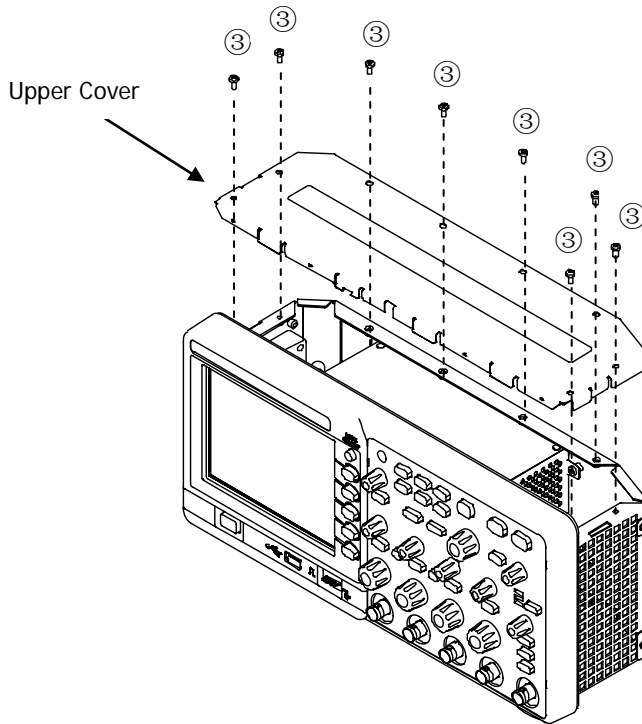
To Disassemble and Assemble the Upper Metal Cover
